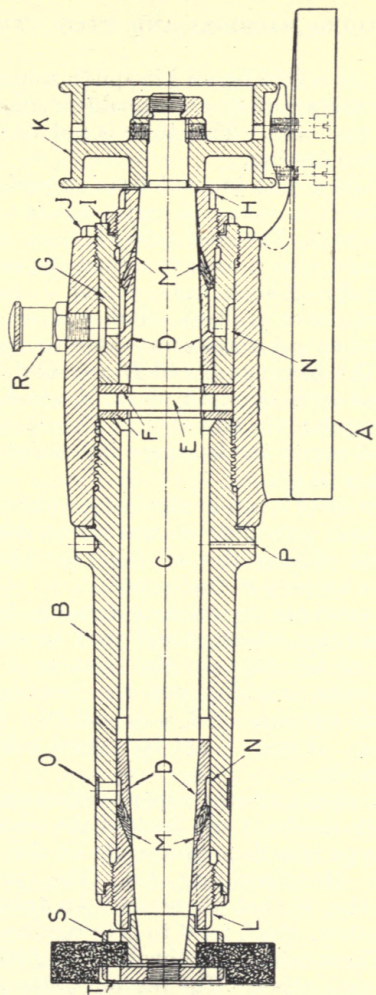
HEALD TUBE-TYPE INTERNAL SPINDLE
